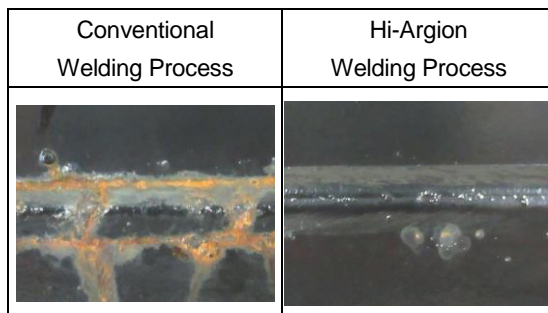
Welding Bead by Hi-Argon Welding Process
